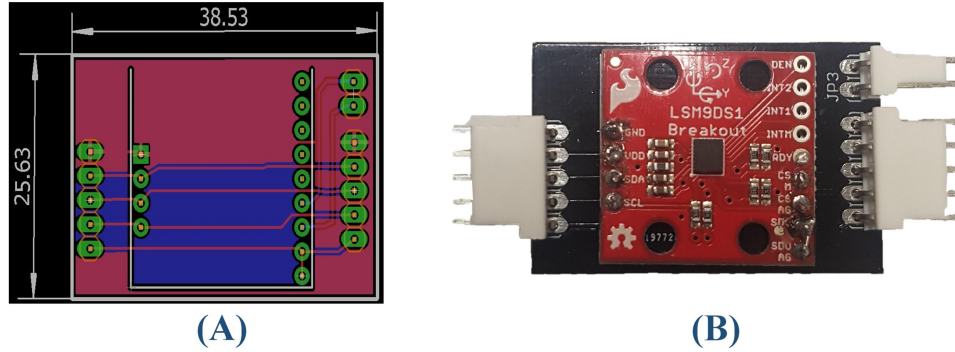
PCBs containing the LSM9DS1 IMUs and SPI connection nodes. (A) Board layout in EAGLE 7.6.0 (B) View of the assembled PCB with connectors.
